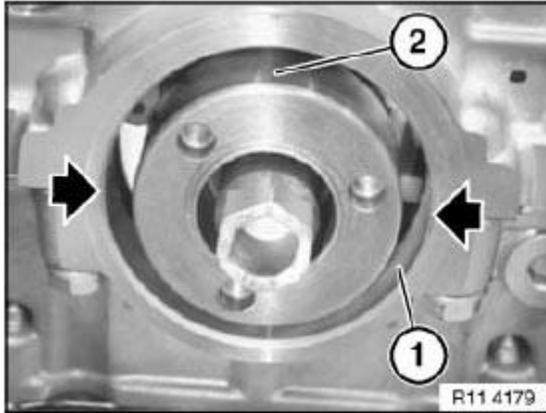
Identifying Sealing Surface And Running Surface Of Crankshaft Seal
